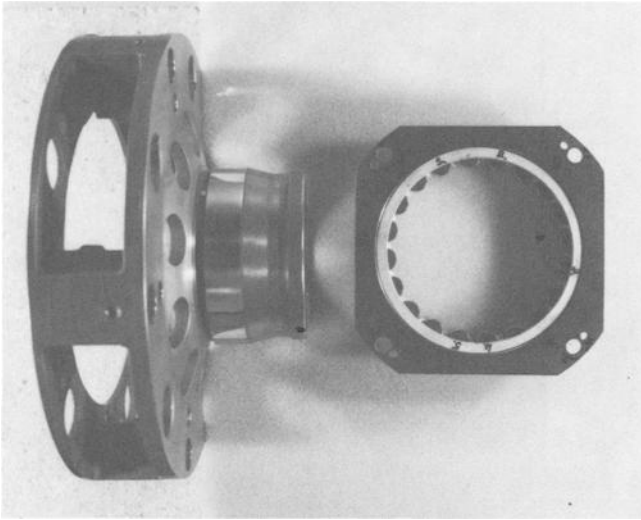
View of the separated No. 5 bearing components showing its construction.
